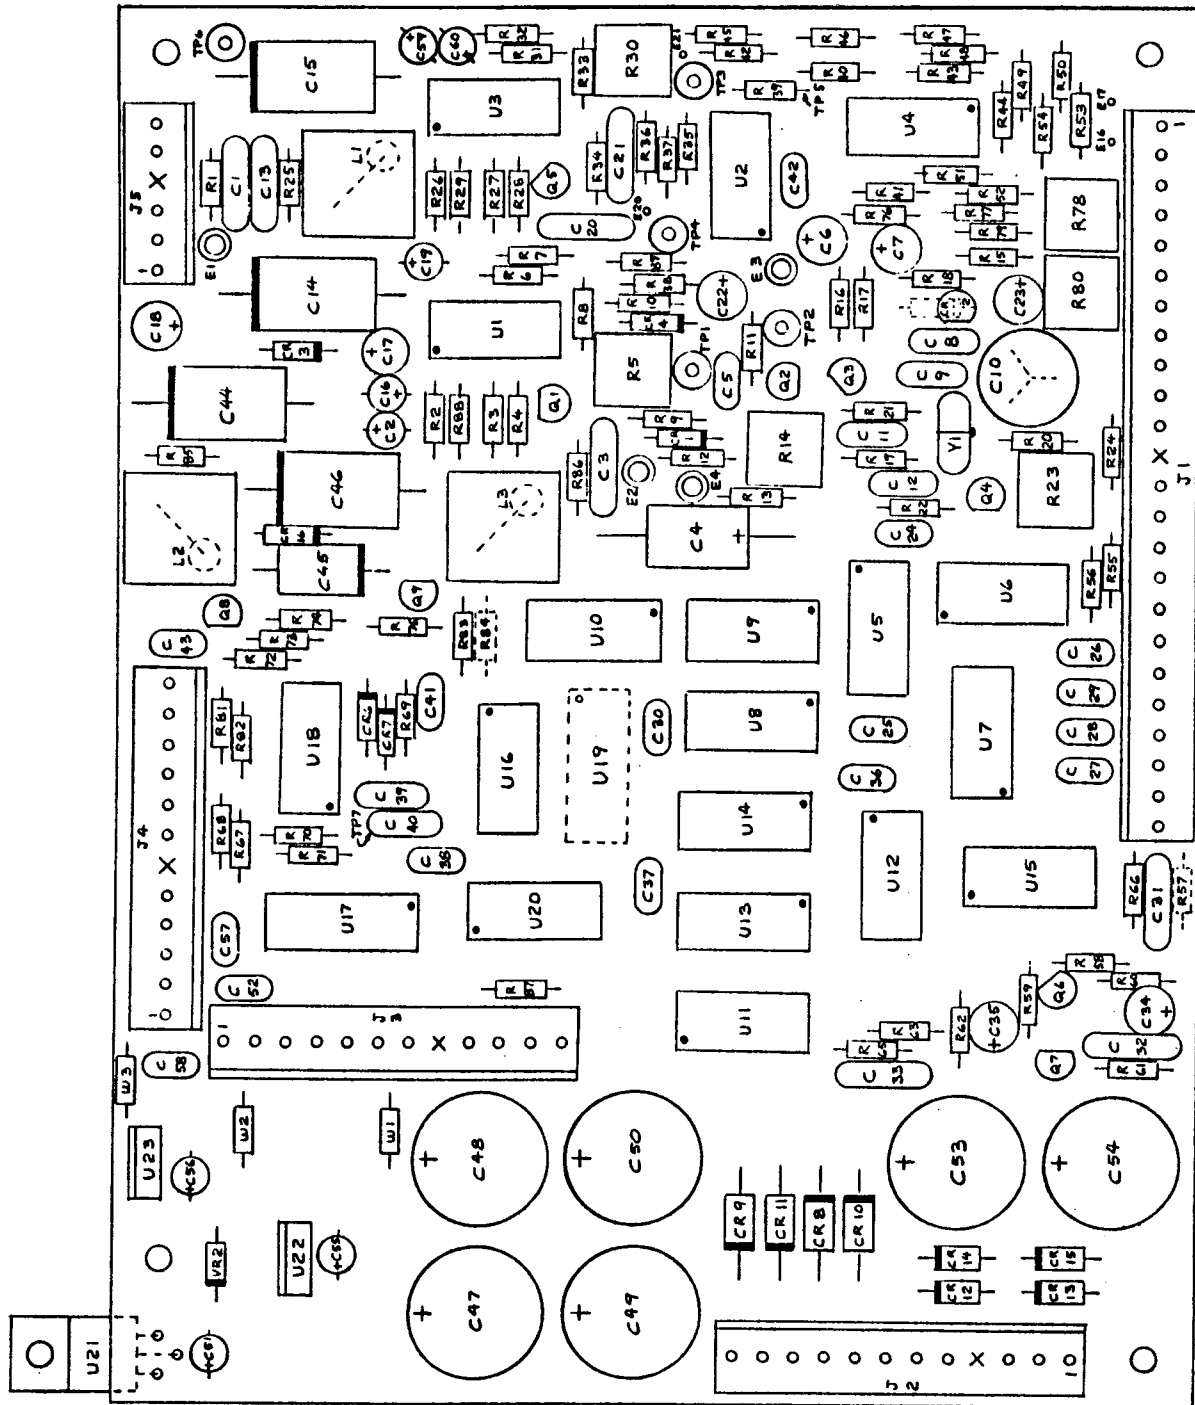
RECEIVER ASSEMBLY A2 COMPONENT LOCATION DIAGRAM
